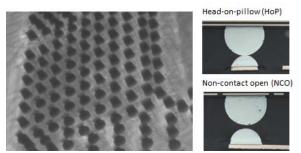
Tilted 2D X-ray image showing stretched solder joints and massive HnP/NCO open failures
